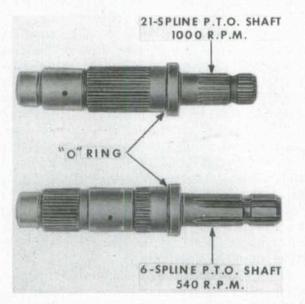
View showing 1000 rpm output shaft (top) and 540 rpm output shaft (bottom). Note location for sealing "O" ring.
